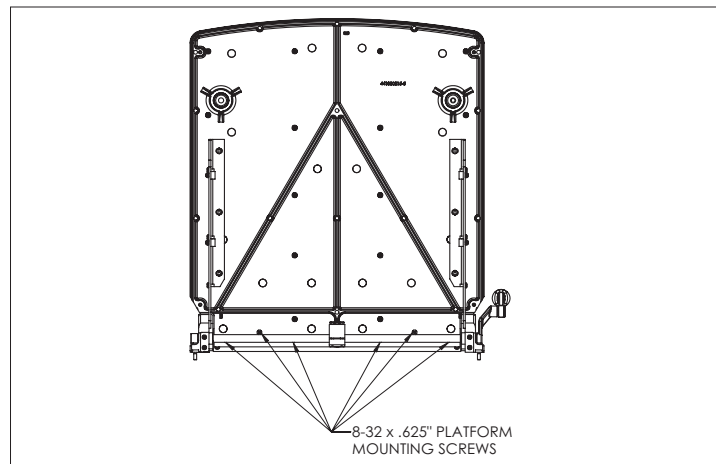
Figure B. The six mounting screws must be removed from the receiver before the platform can be removed.
